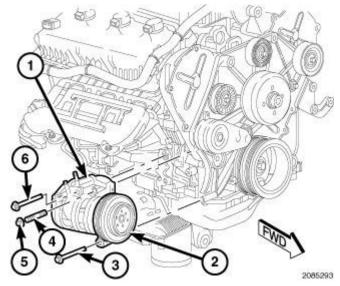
Removing/Installing A/C Compressor Courtesy of CHRYSLER LLC
